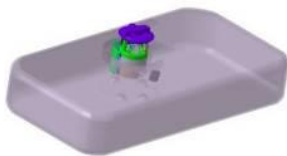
6. Tank assembly – closed wings - pre-assembly
